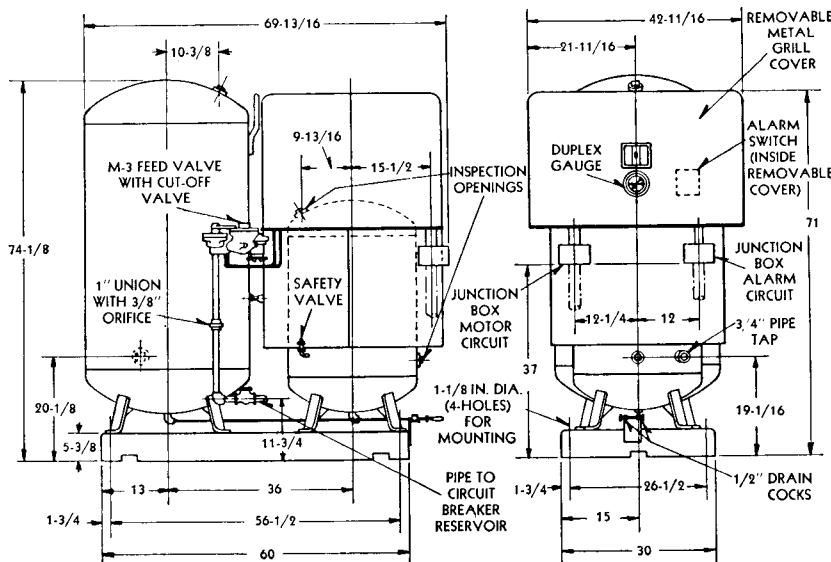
AIR SUPPLY UNIT WITH SINGLE COMPRESSOR
